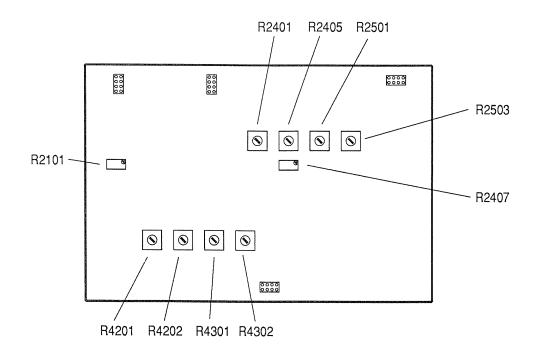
DCX-127 DMM BOARD TEST AND ADJUSTMENT POINTS
